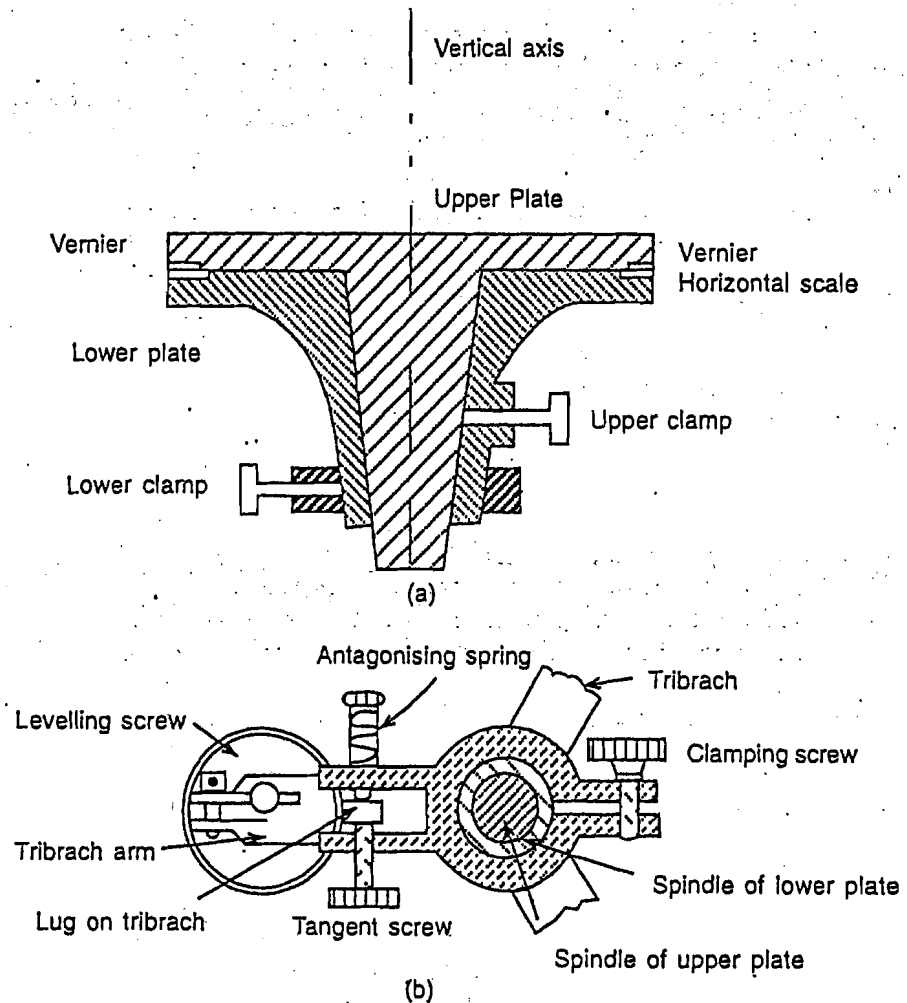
(a) Longitudinal section through upper plate and lower plate. (b) Cross section of spindles.
